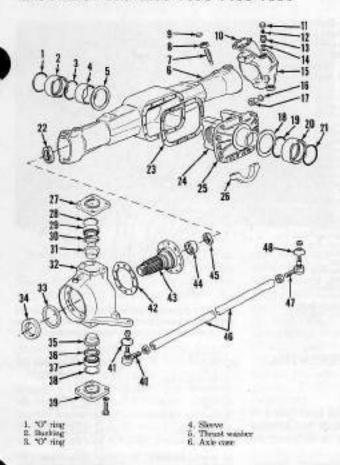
Exploded view of Carraro front drive axie showing component parts and their relative positions.
